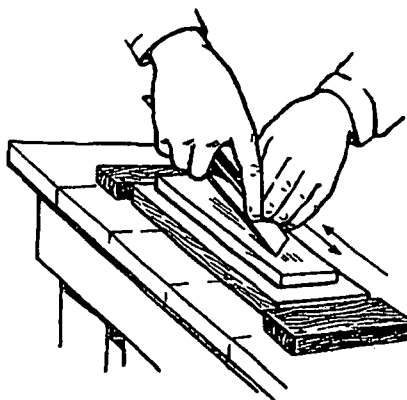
This figure shows the correct way to whet a wood chisel or a plane iron on an oilstone to produce a sharp cutting edge. The bevel should be placed on the stone with the back edge slightly raised.
